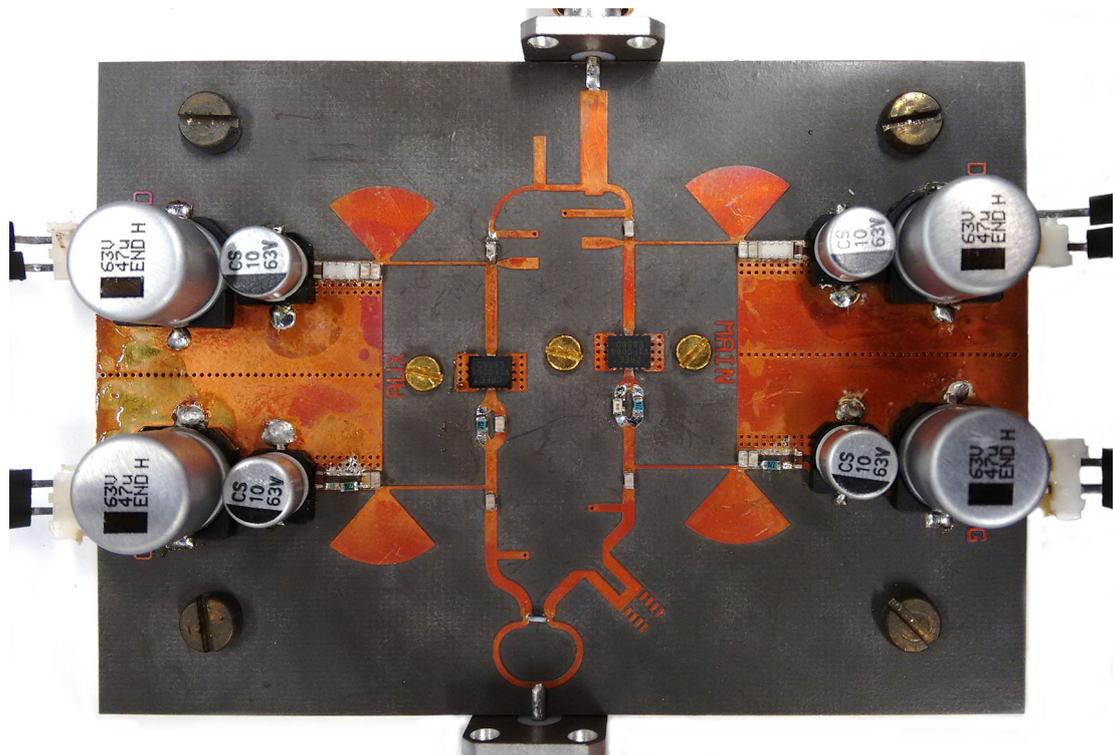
Assembled 6 GHz Doherty PA prototype developed from load-pull measurement data. PCB dimension are 61x86 mm.
